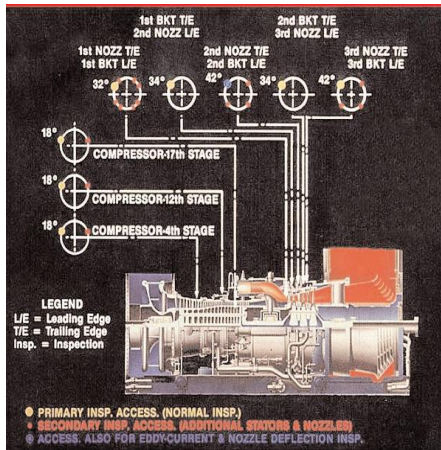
MS7001E gas turbine borescope inspection access locations. [4,p.4]
